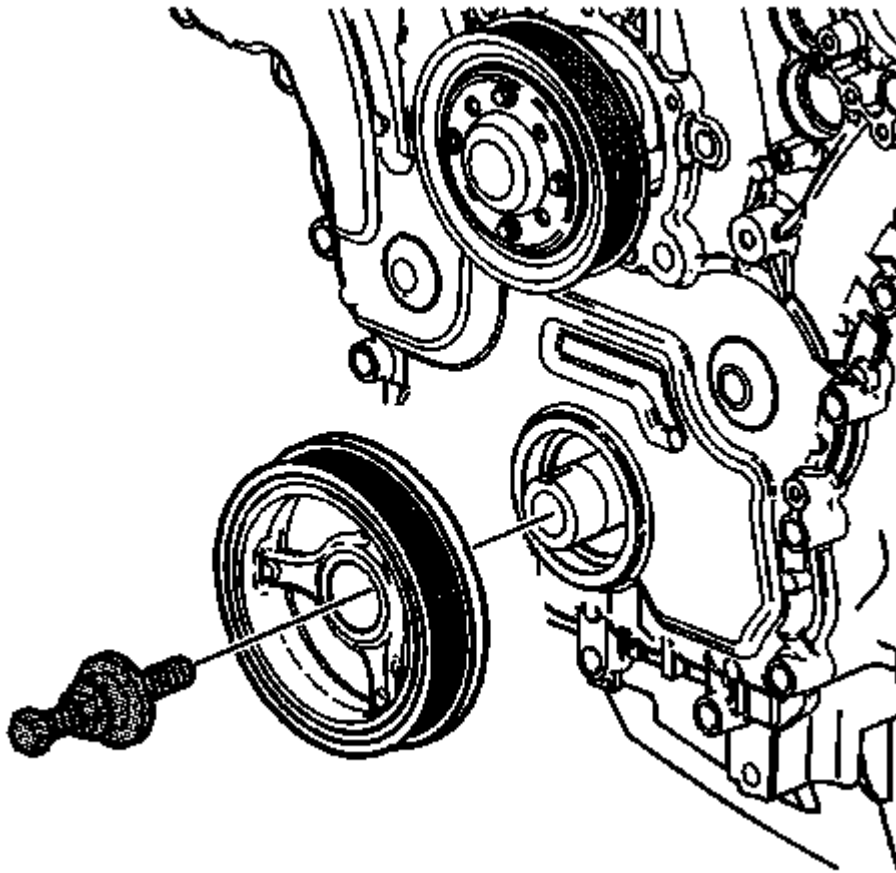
View Of Crankshaft Balancer & Installation Tool
